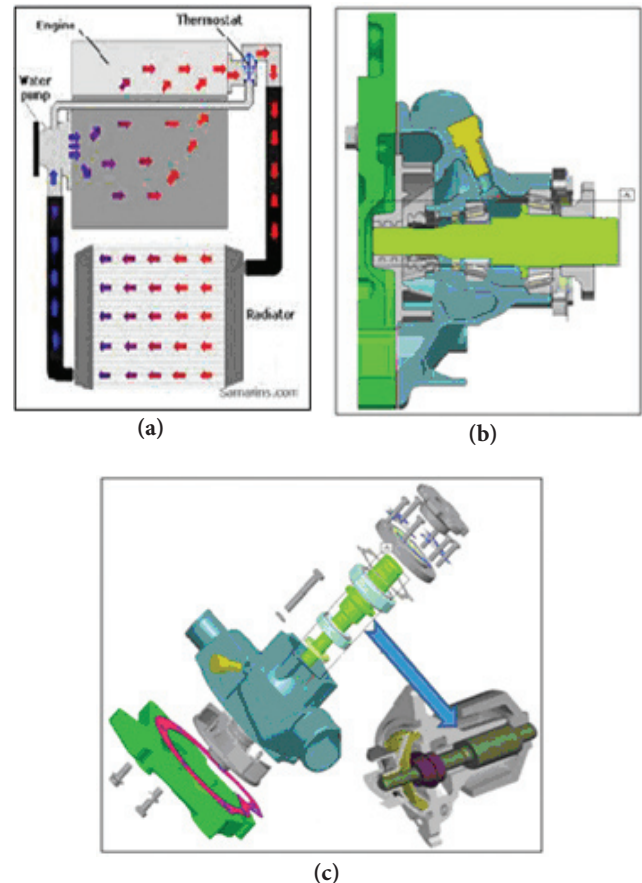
(a) Circuit diagram. (b) Cross sectional. (c) Exploded views of the existing water pump in cooling system.
